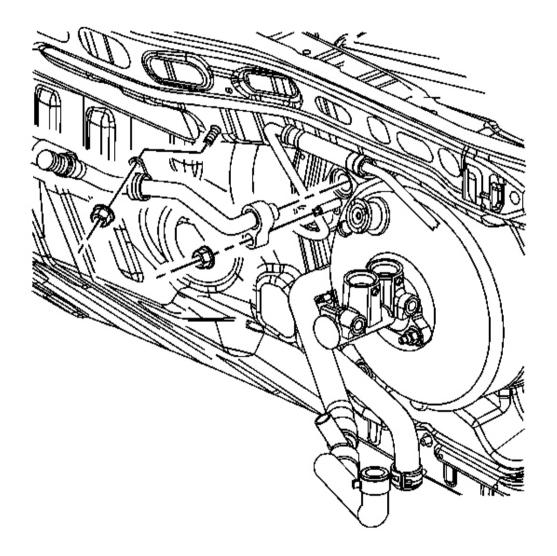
Evaporator Outlet Hose, Nut & TXV Courtesy of GENERAL MOTORS CORP.
